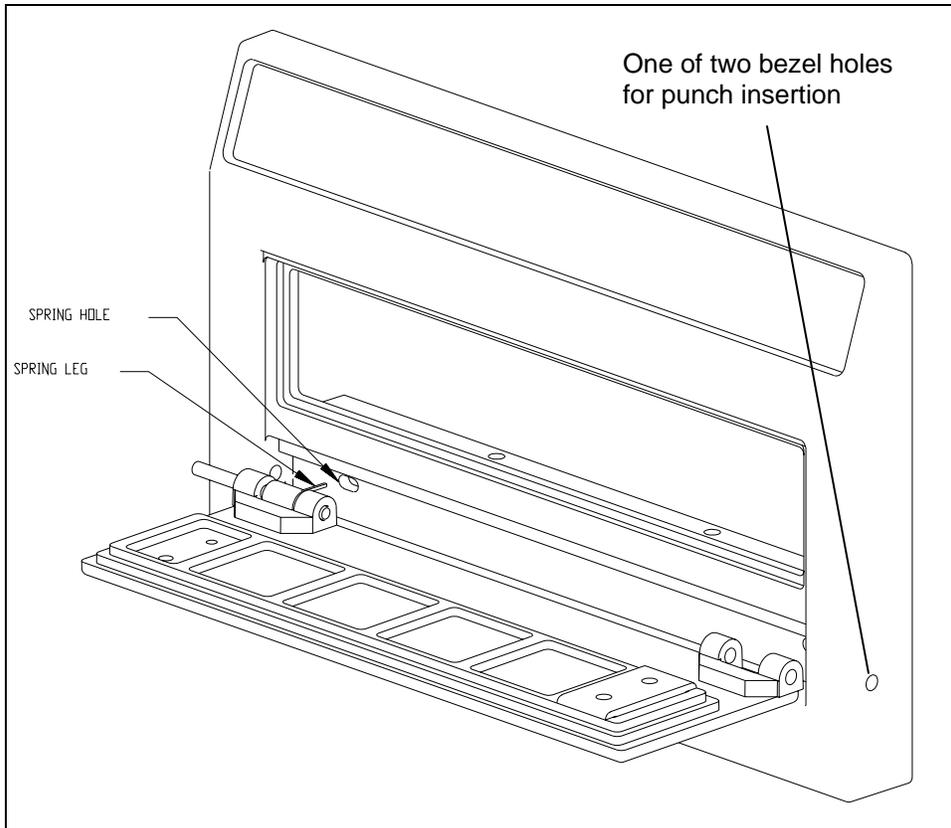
Positioning the Punch Removing the Pins for the Door Hinge
